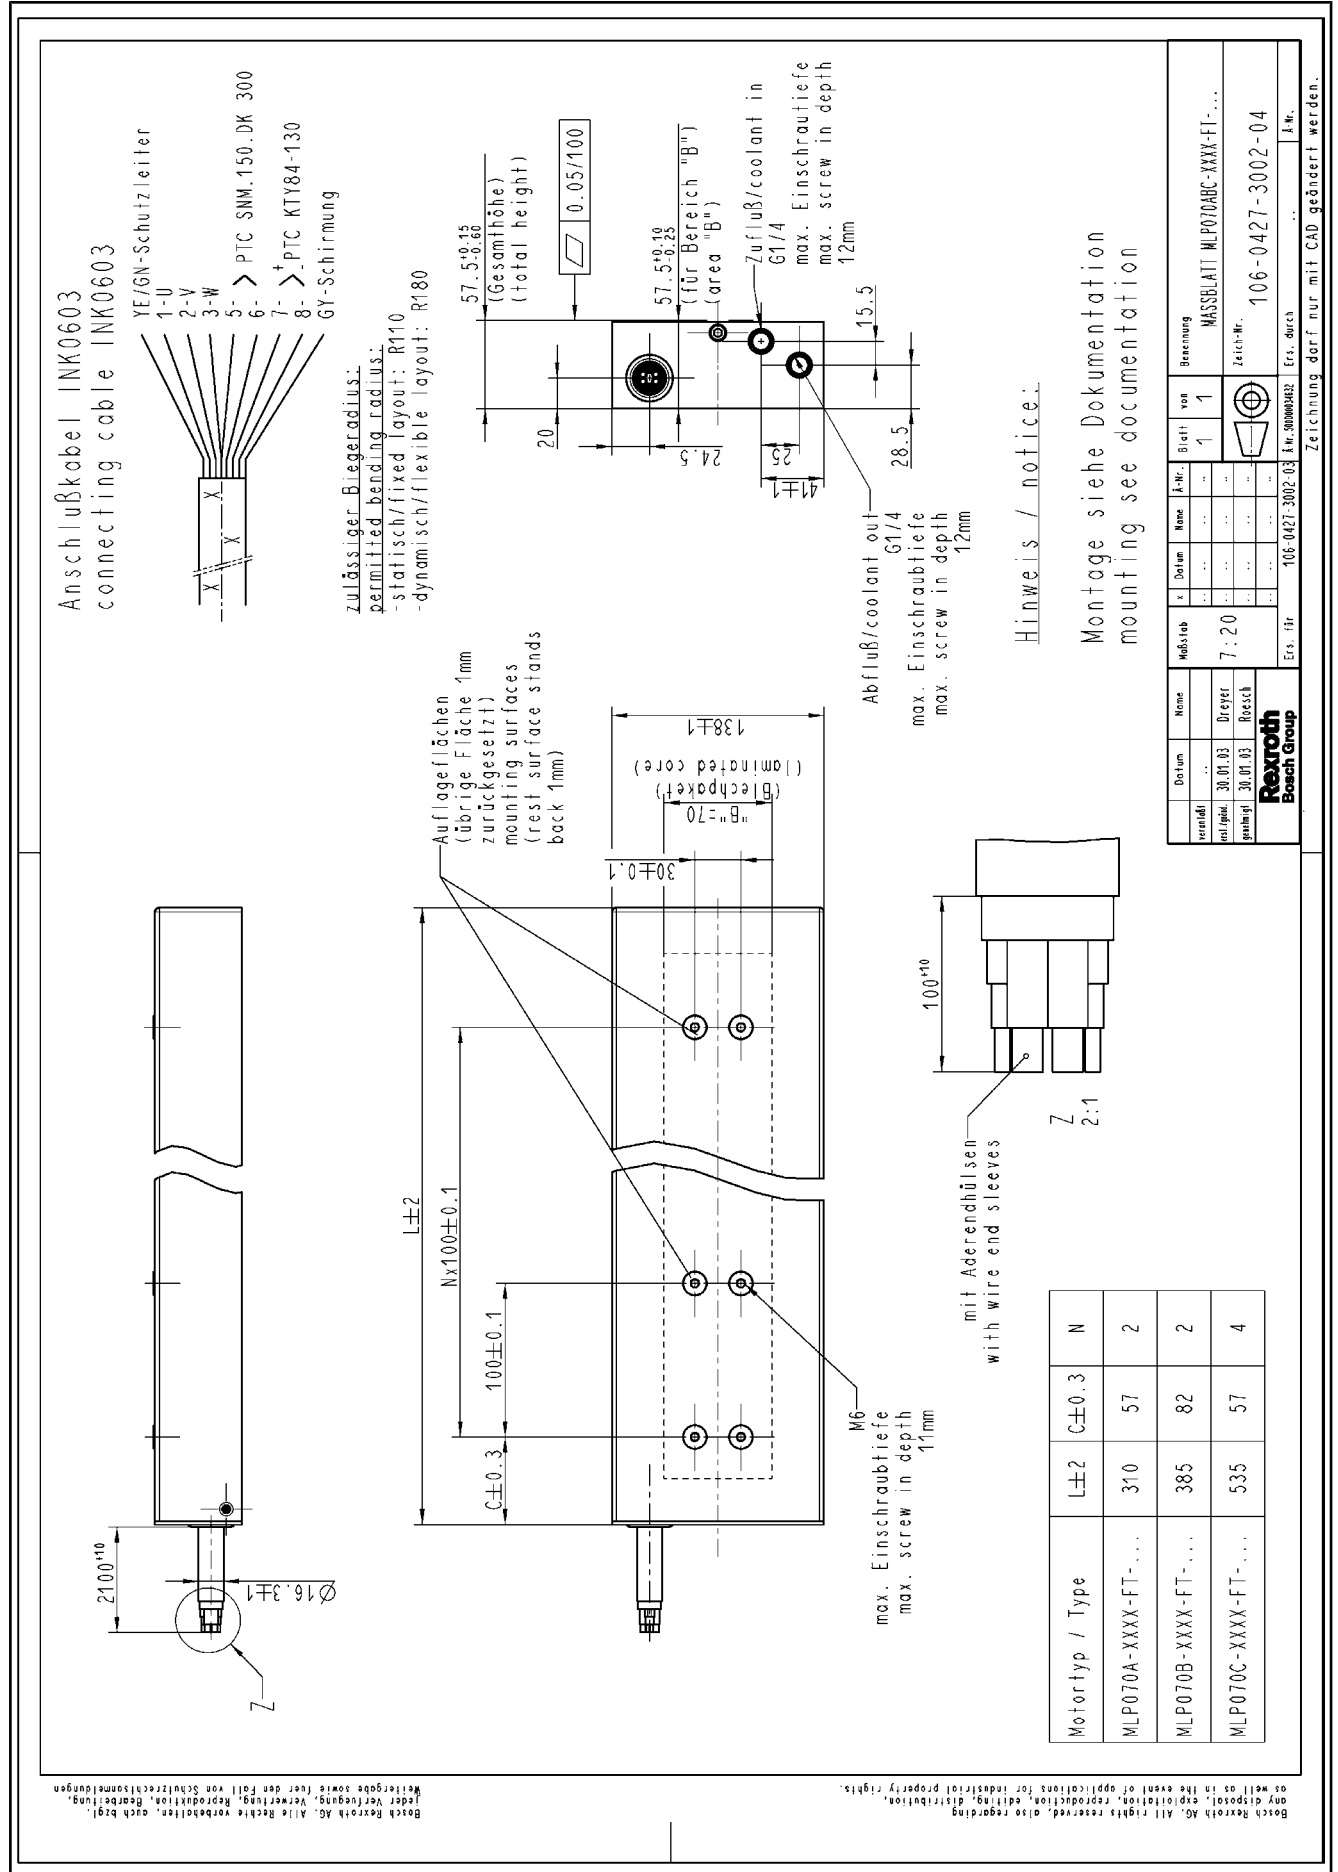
Primary Part MLP070 with Thermo Encapsulation
